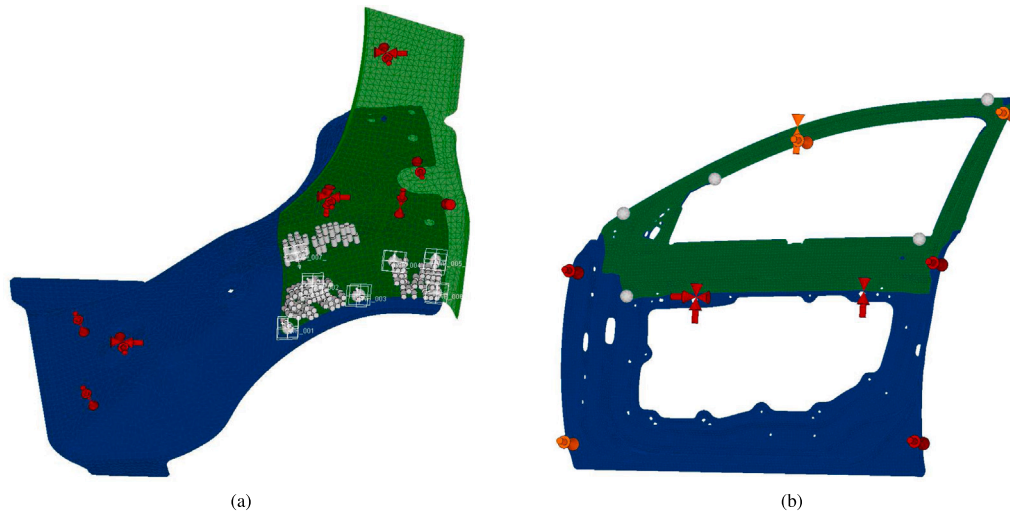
Illustrations of the two industrial sheet metal assembly cases (a) and (b) where there are two sheet metal parts, blue and green, clamped into position for a subsequent spot welding operation. There are 12 and 19 locators, respectively, of the fixture, red and orange, that can be adjusted along their axis to improve geometry of the welded assembly. (For interpretation of the references to colour in this figure legend, the reader is referred to the web version of this article.)
